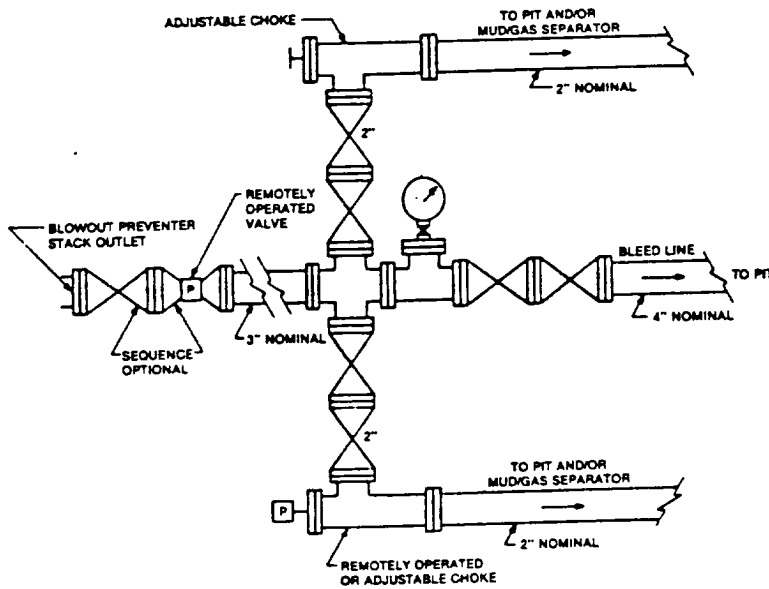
Typical choke manifold assembly for 5M rated working pressure service — surface installation.
